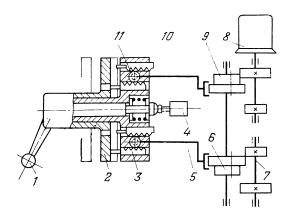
Elementary diagram of the single-lever selective speed-changing mechanism for controlling four speeds in the model 262Γ horizontal boring machine manufactured by the Sverdlov Machine Tool Plant of Leningrad
